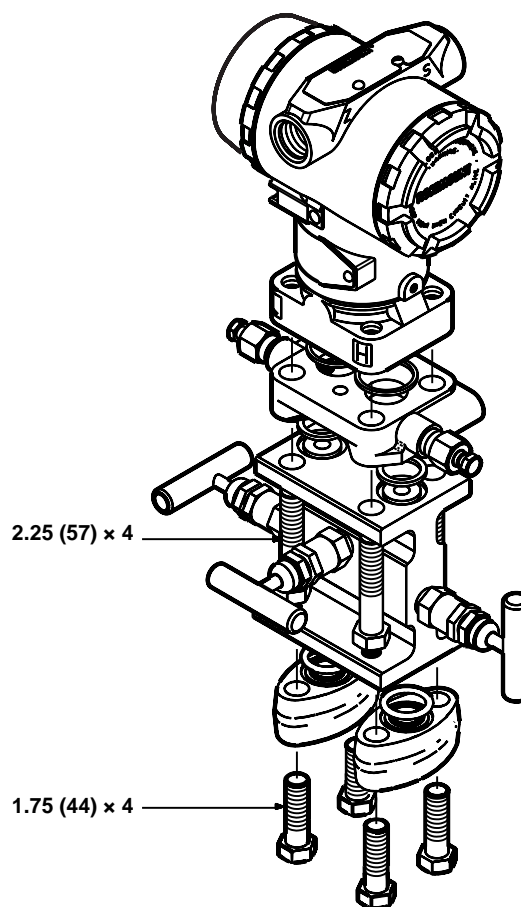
Mounting Bolts and Bolt Configurations for Coplanar Flange
